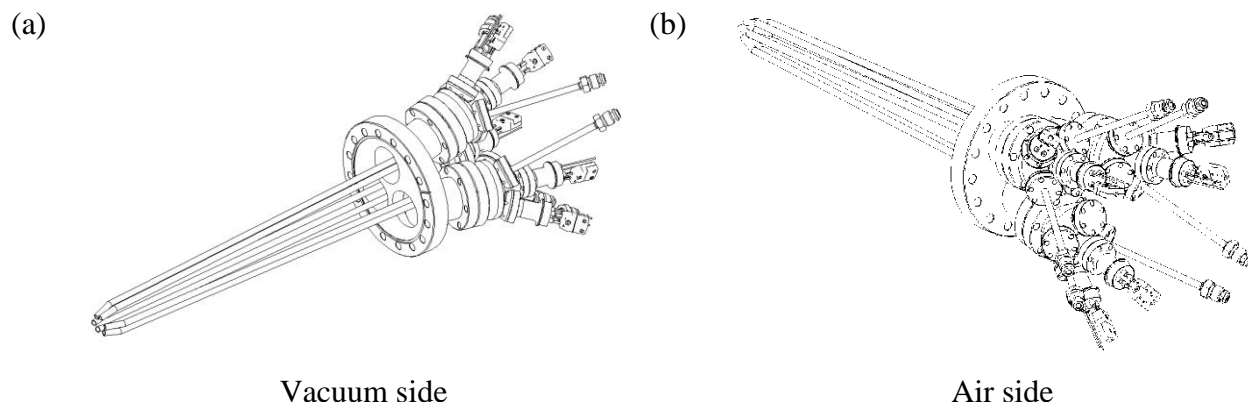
Schematic drawings showing (a) vacuum side and (b) air side for six doser array designed in-house
